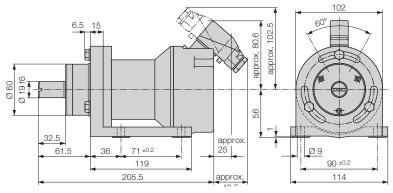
KINAX WT 707 with additional gear, plug connector and foot.
